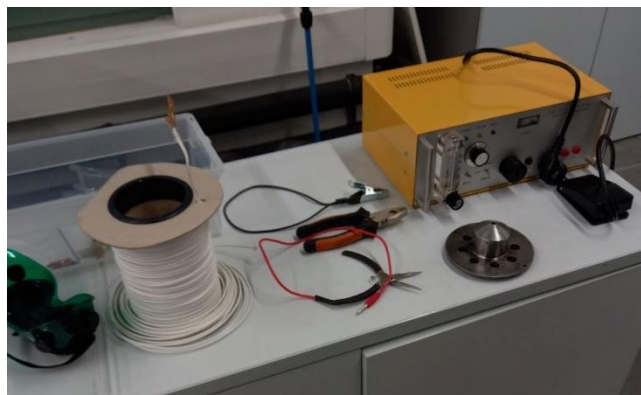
The SR-80 Universal Welder and its accessories.
